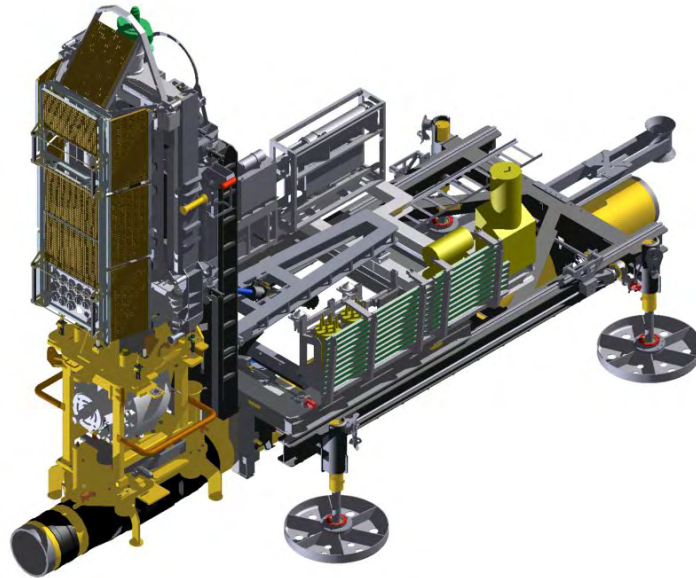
CAD figure of the PIF engaged with the HTT and HTVM[6].
